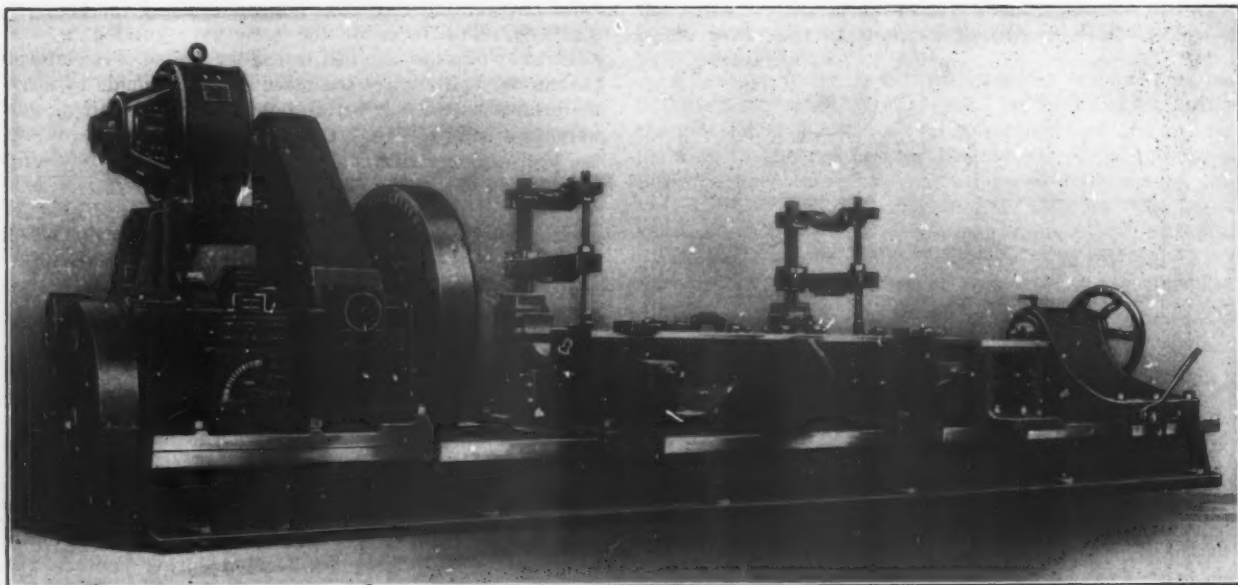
A 50-In. Electrically Driven Roll Lathe Built by the A. Garrison Foundry Company, Pittsburgh, Pa.
